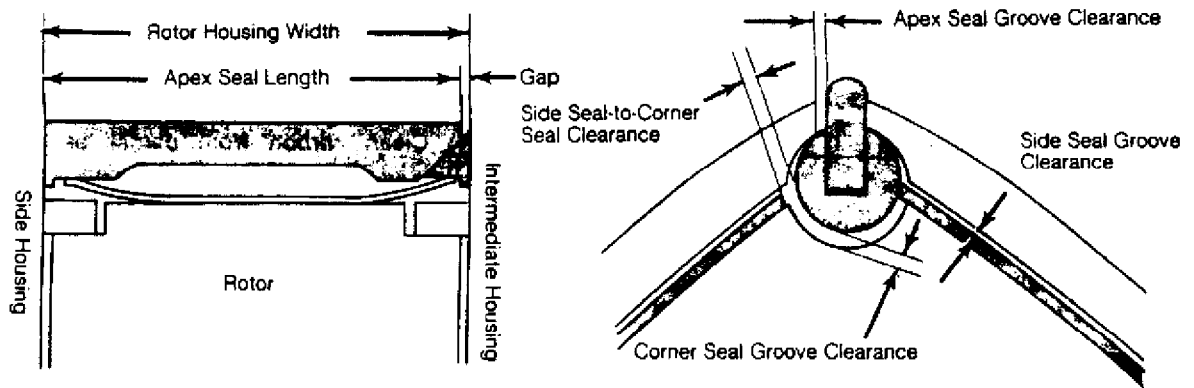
Measuring Apex, Side & Corner Seal Clearance
